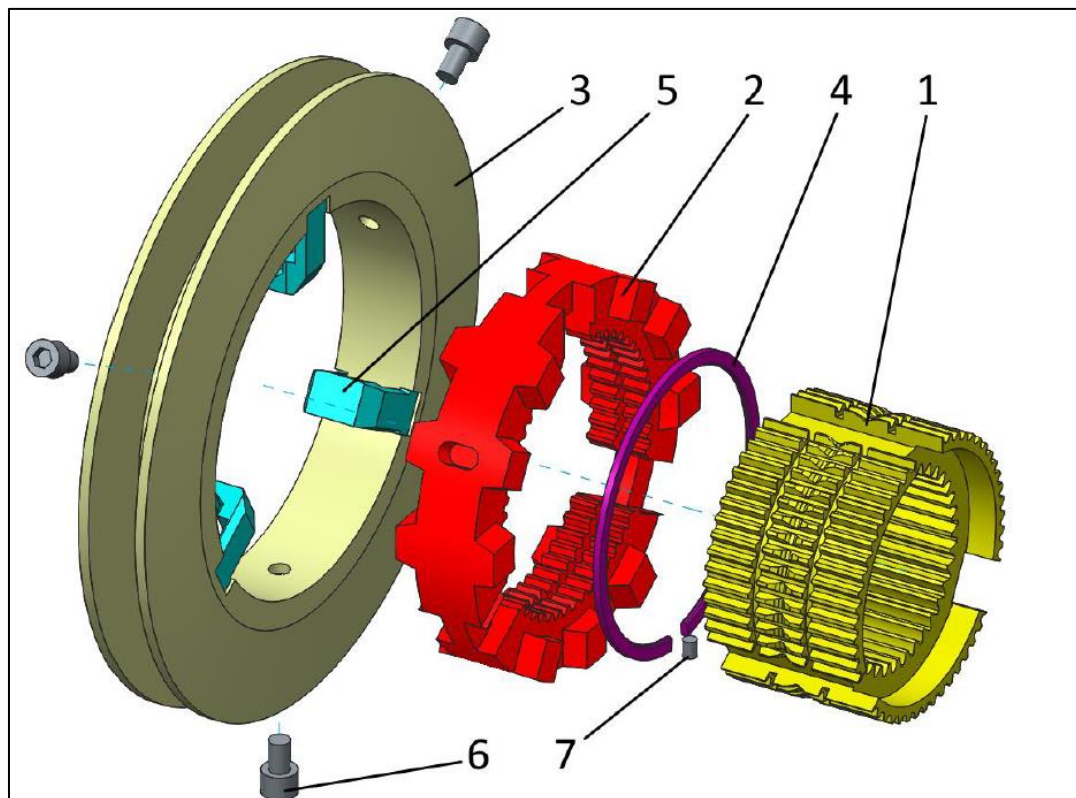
Exploded view of Dog clutch with blocking mechanism
